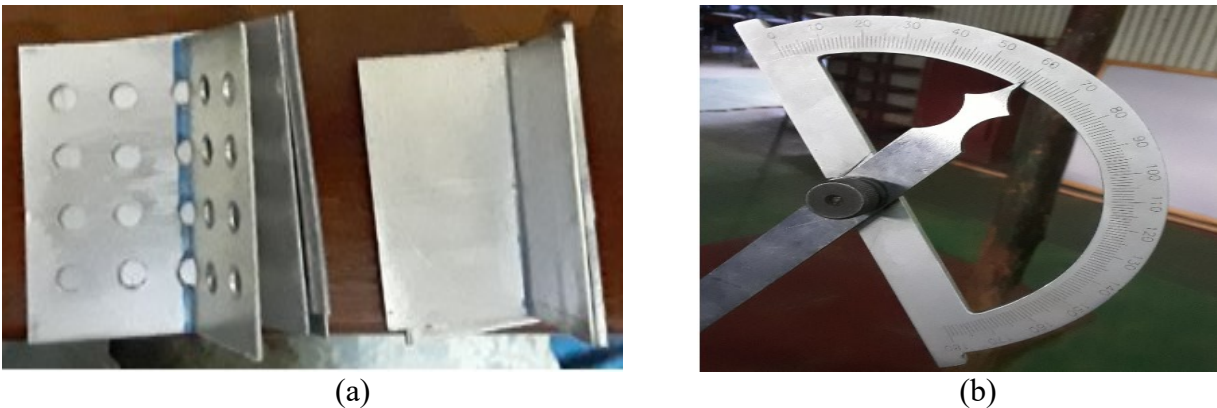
Measuring bend angle of workpieces: (a) bended workpieces and (b) bevel protractor
